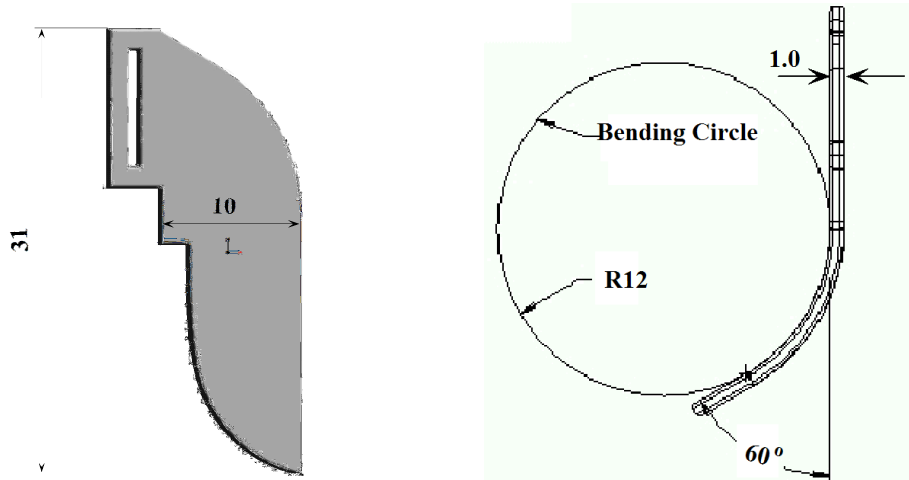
CAD drawings (*Pro-E*) of one of the SMA fins when it is straight (left) and when it twists by 60° (right). Dimensions are in mm.
